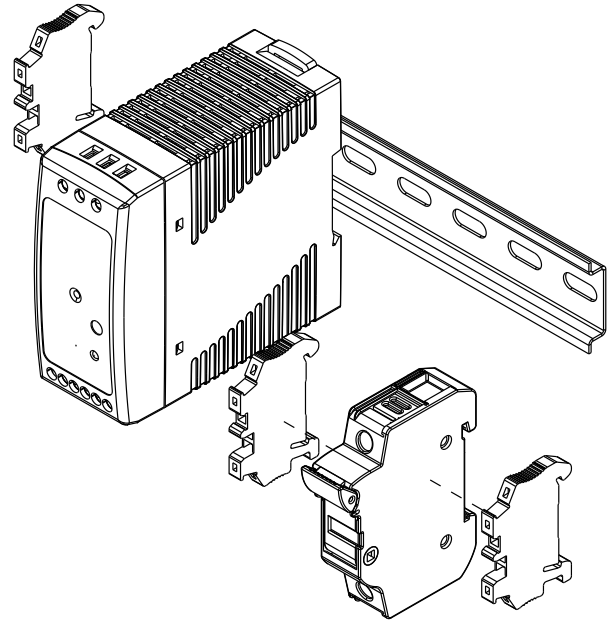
Remote Connectivity Assembly (P/N 2007166039)
